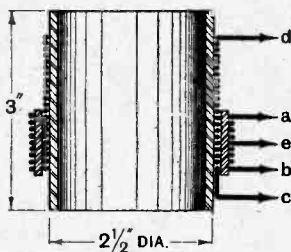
Sectional sketch showing details of the H.F. transformer.
